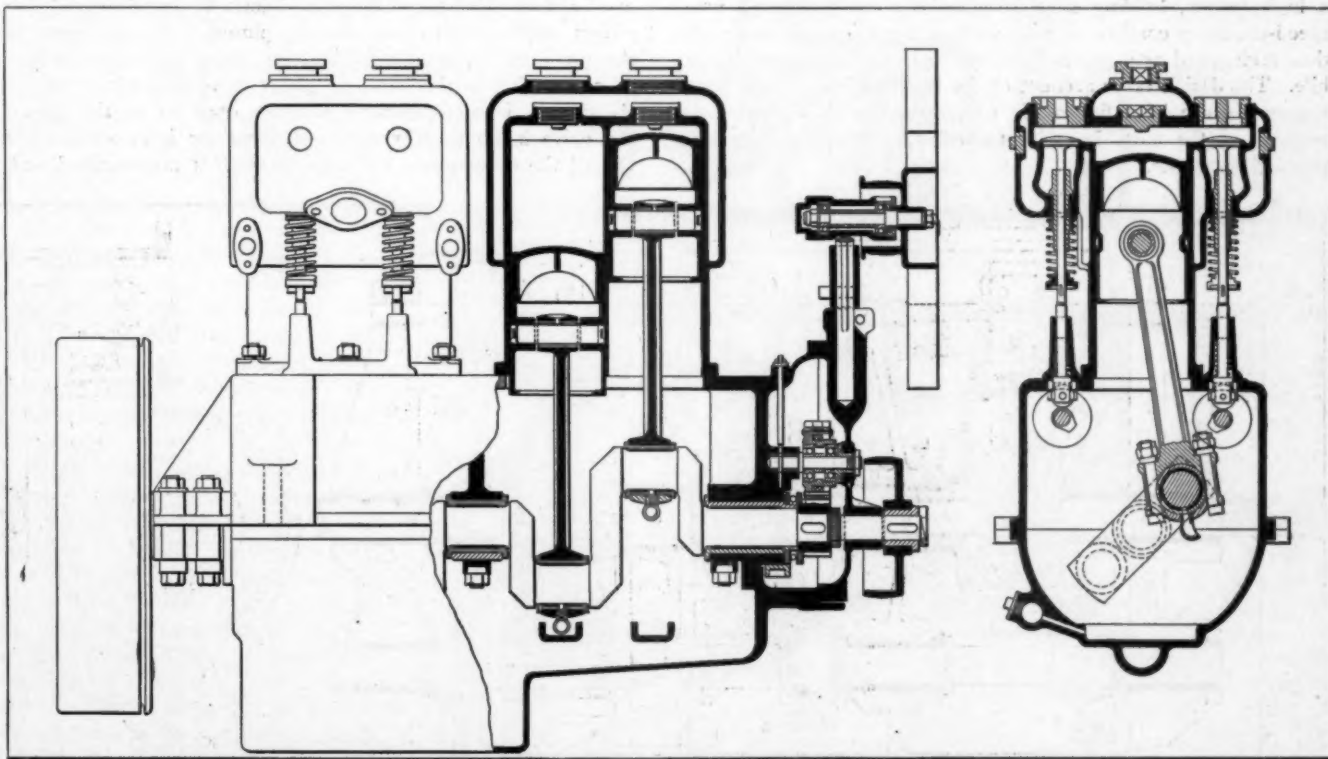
Sectional view of the Commer motor, showing heavy crankshaft, long bearings and independent lubrication system
